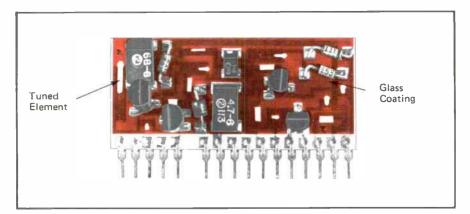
A coating of glass, with holes for attaching components, is screened on the surface of hybrids to protect them from moisture and to provide electrical insulation. The elements that make up the hybrid are tuned by using a laser trimmer to cut through both the protective coating and the circuit elements.
